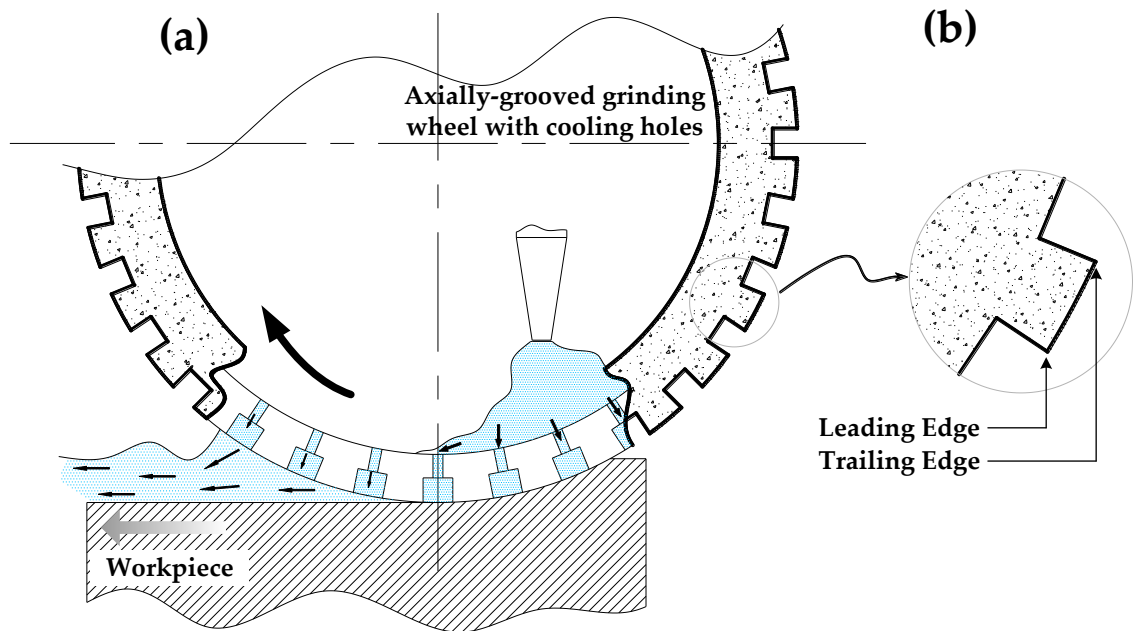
Axially-grooved wheel with cooling holes [29]
